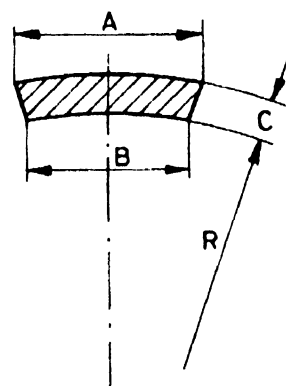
SECTION OF ARMOUR FORMED WIRE
